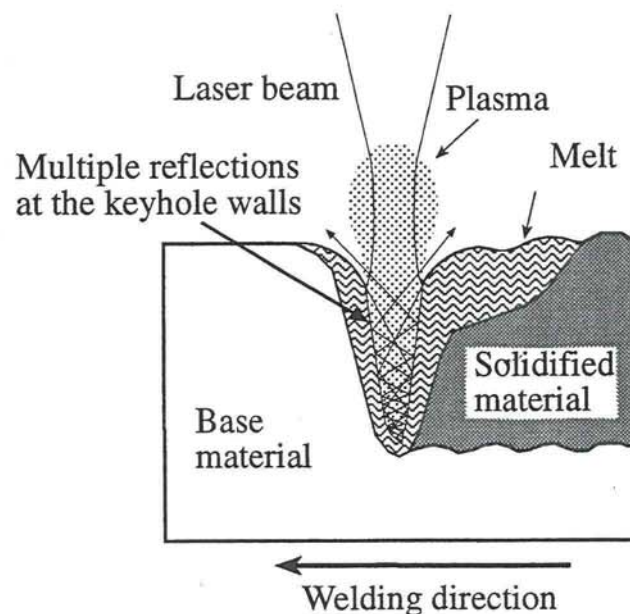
Schematic of the deep penetration laser welding process.
